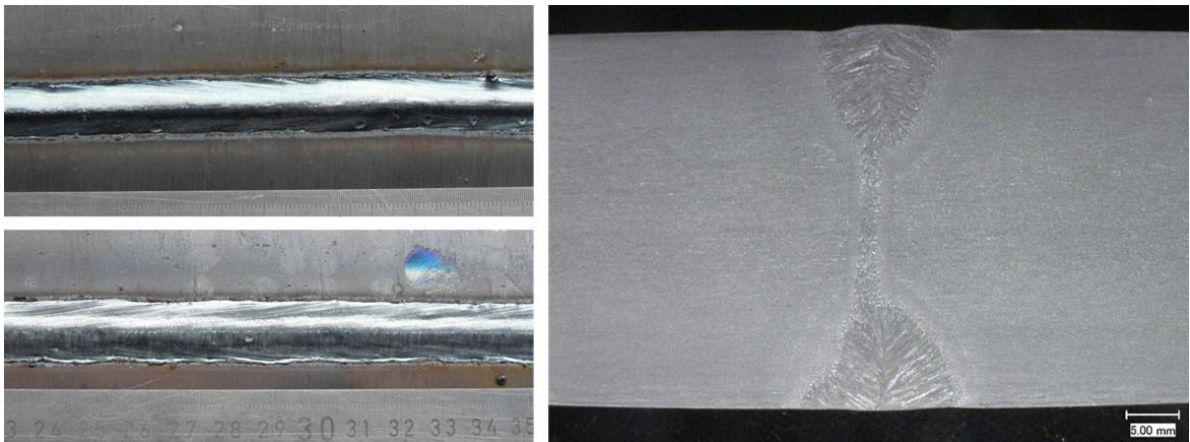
X65, 35 mm, 3 mm positive wire – Weld Seam Appearance (left) – Cross-Section (right).
